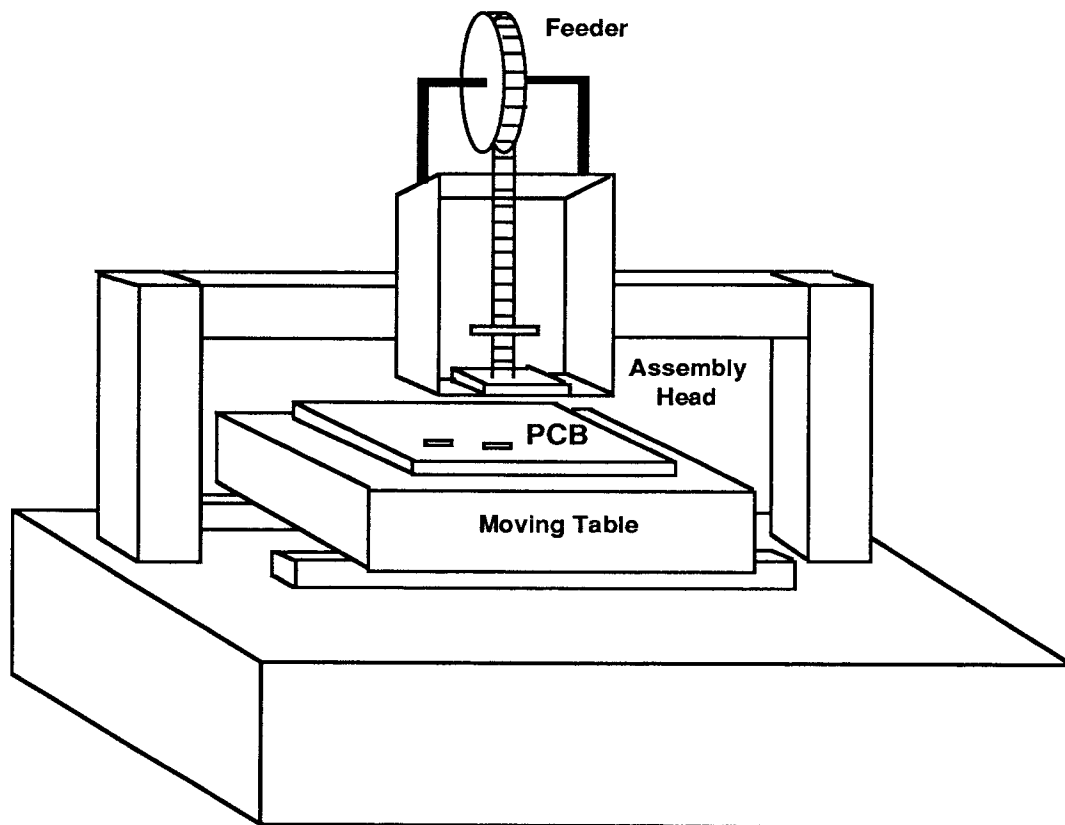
Assembly machine for type one problem. The assembly head is fixed in the (x, y) coordinates while the table moves when performing the assembly of components.
